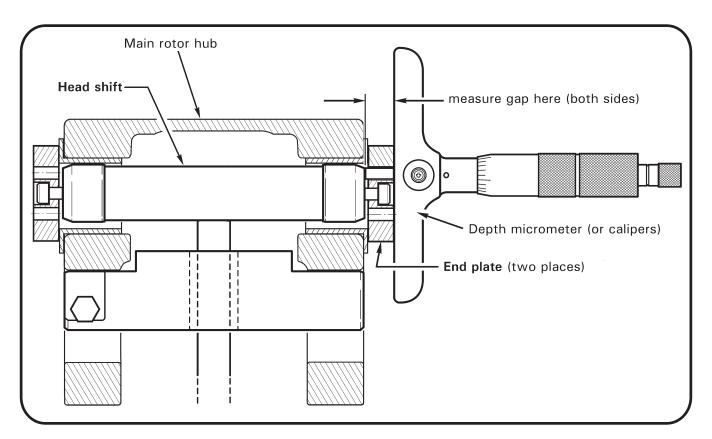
MEASURING GAP BETWEEN THRUST WASHER AND HUB BEARING
